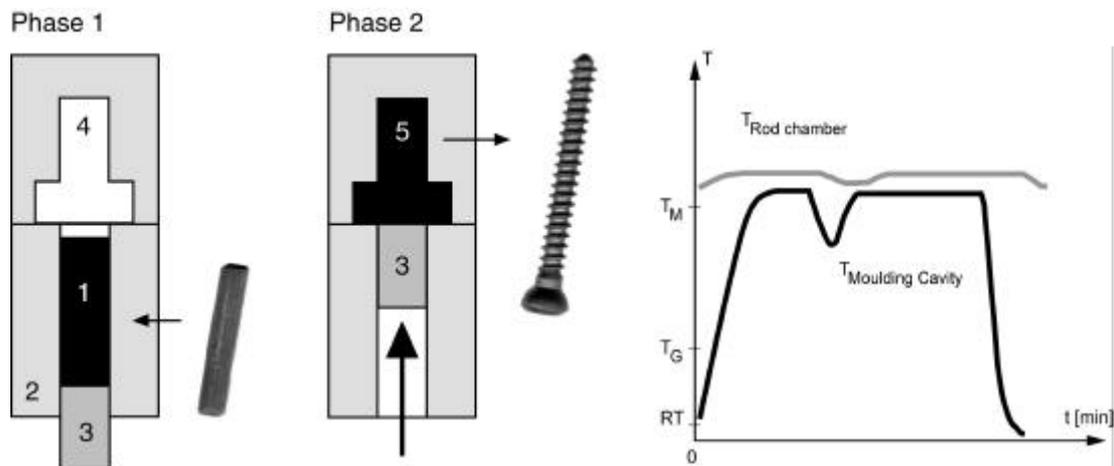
Principle of TSF: The rod (1) is heated above melting point in the rod-chamber (2) squeezed by a stamp (3) into the moulding cavity (4). Stamp, rod-chamber and moulding cavity are the parts forming the fastener (5).
